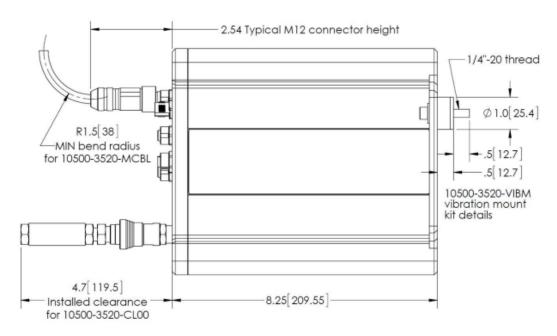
The 3520 Leak Test module dimensions in inches [mm] - side view
